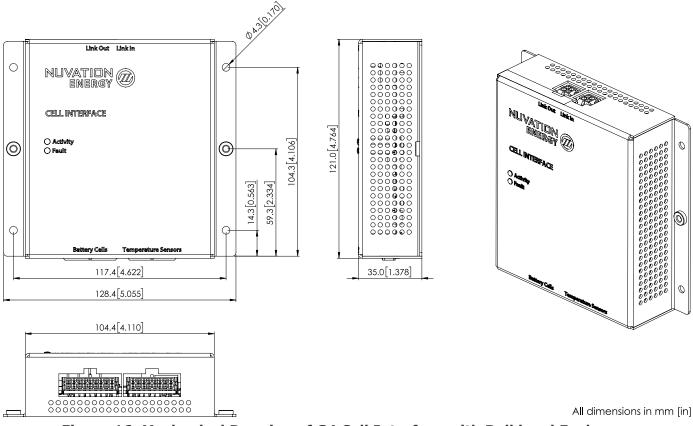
Mechanical Drawing of G4 Cell Interface with Bulkhead Enclosure
